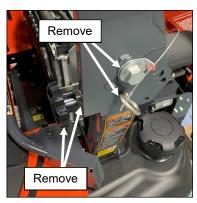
(Remove hand screws and ROPS Bolt)
